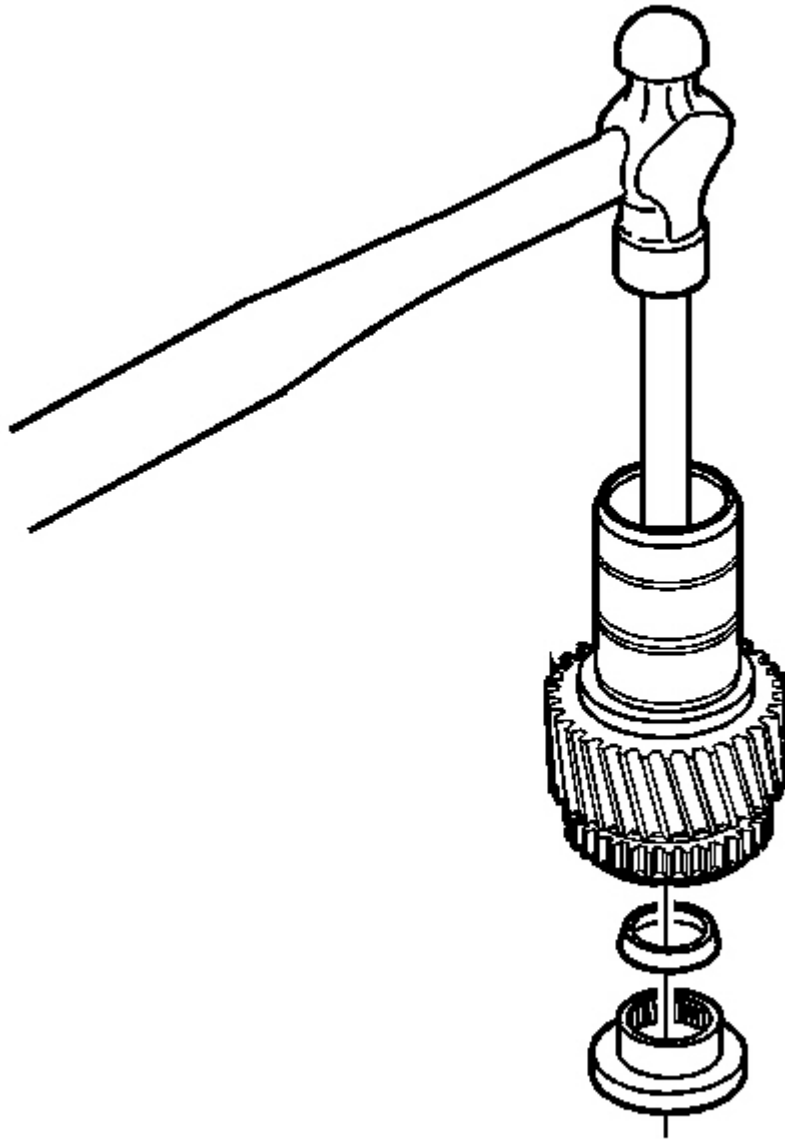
View Of Planetary Gear Large Diameter Thrust Washer
